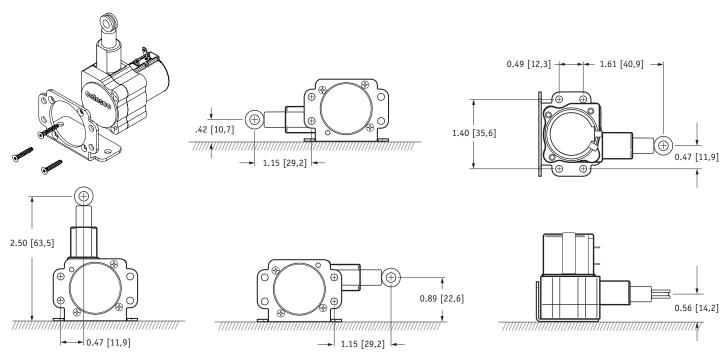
Outline Drawing (w/optional Universal Mounting Bracket):
